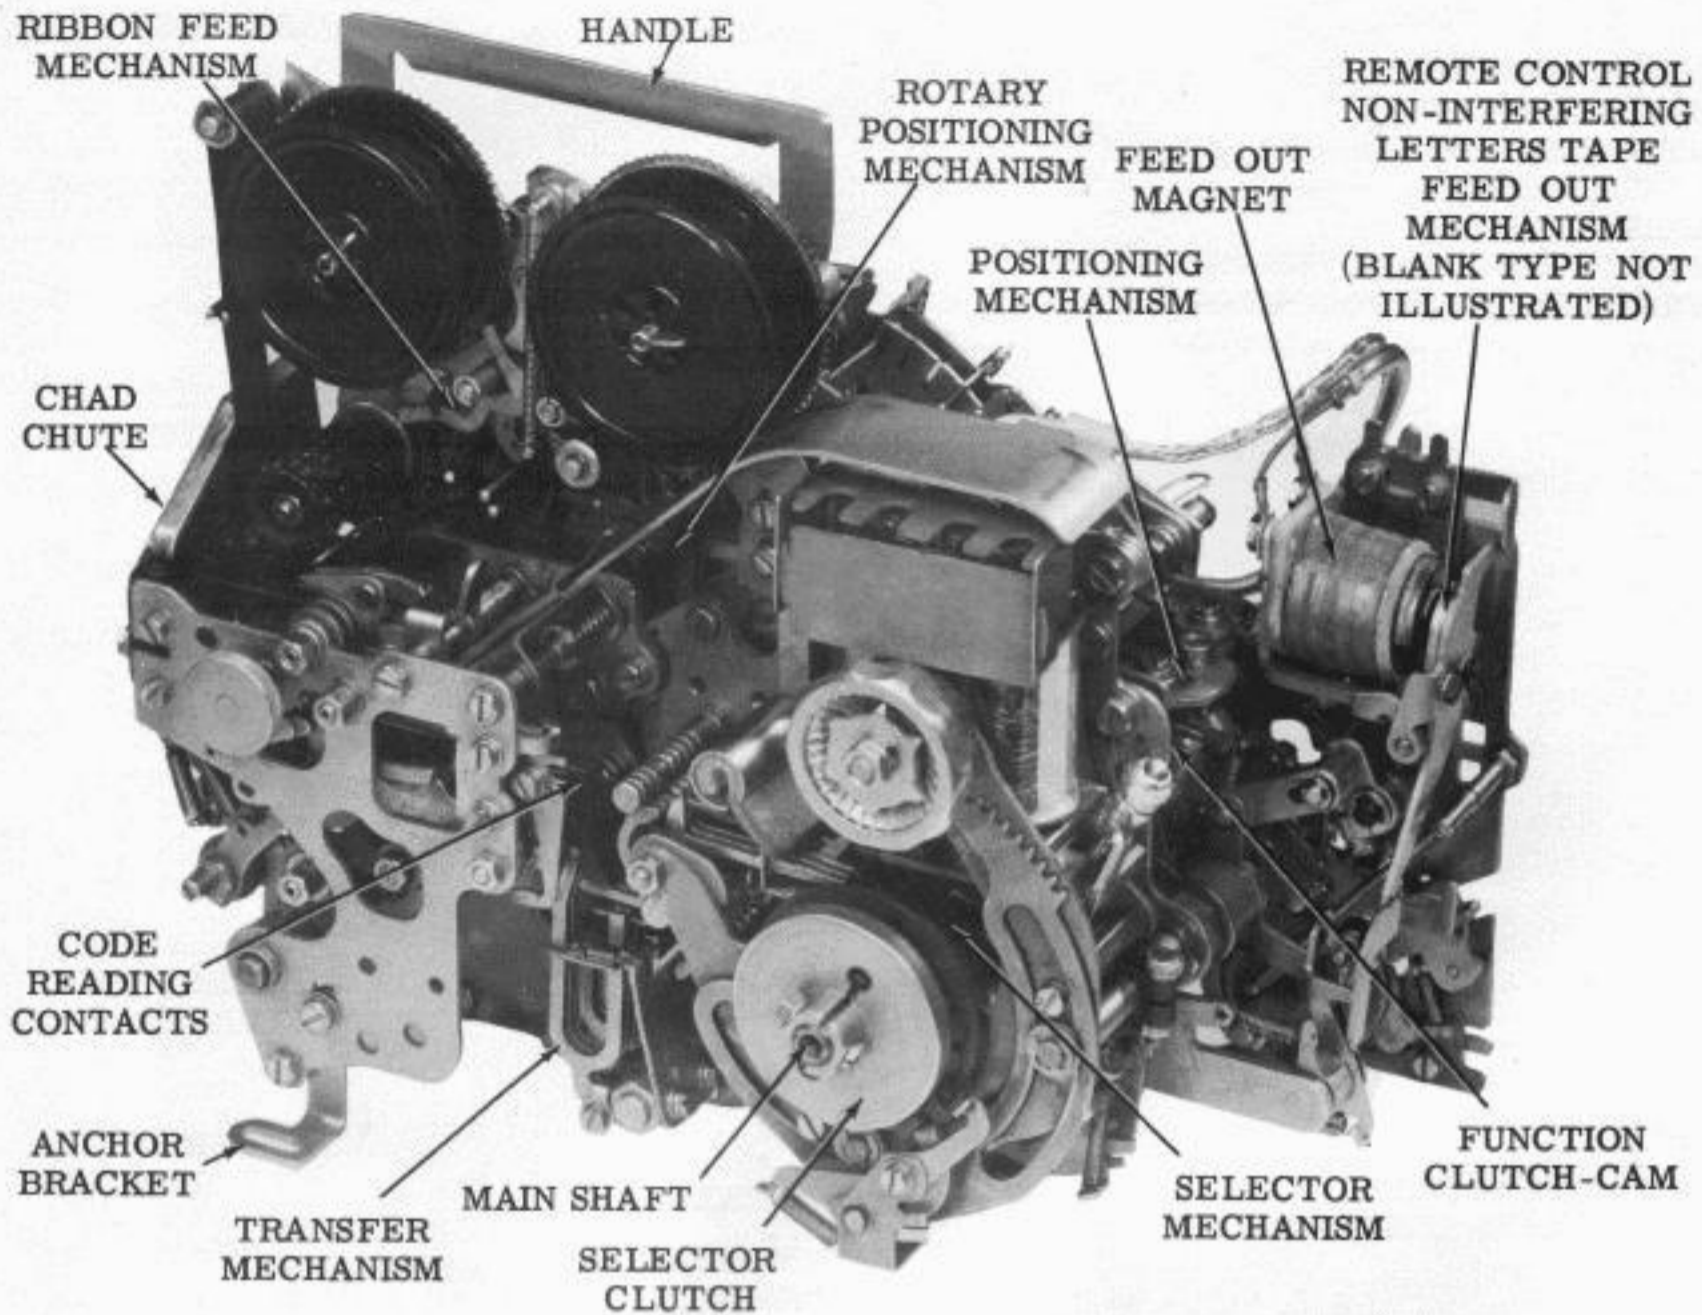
28 Typing Reperforator Unit - Fully Perforated Tape (Left Rear View)
